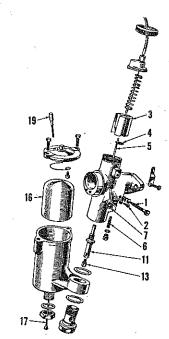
Exploded view of Amal Monobloc carburetor typical of that used on some models. Refer to Fig. TM1-1 and the following for legend.
